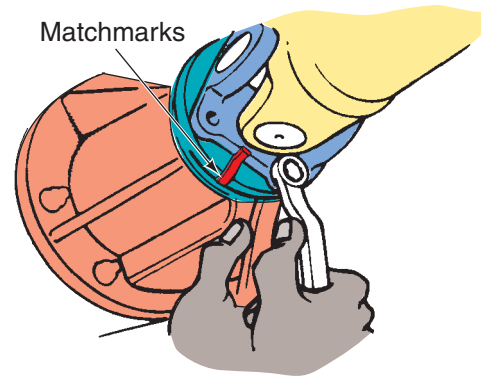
Make sure to index the rear yoke to the companion flange before removing the drive shaft.
